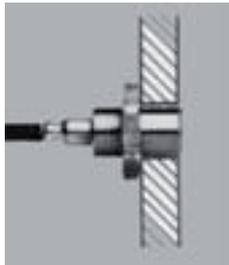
Example of flush assembly of a shielded sensor in a metal support
